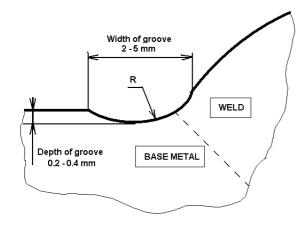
Profile of weld toe improved by Ultrasonic Peening
